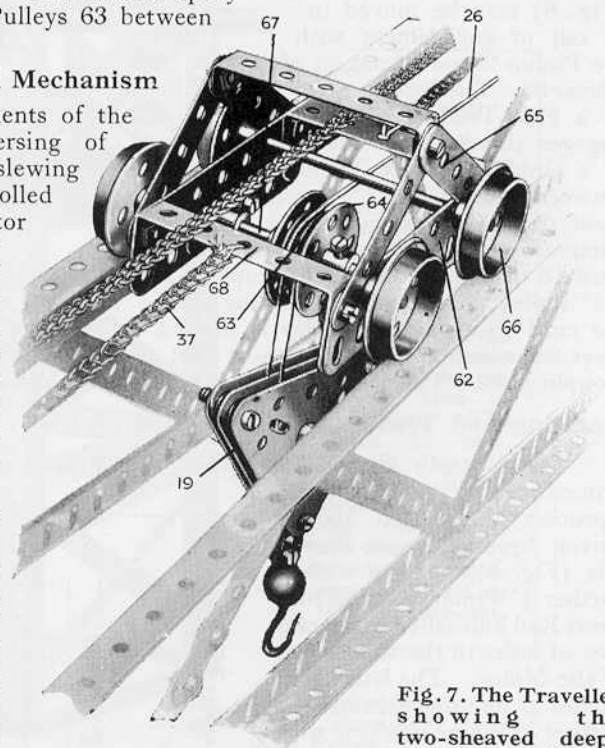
The Traveller showing the two-sheaved deep-groove pulley.
